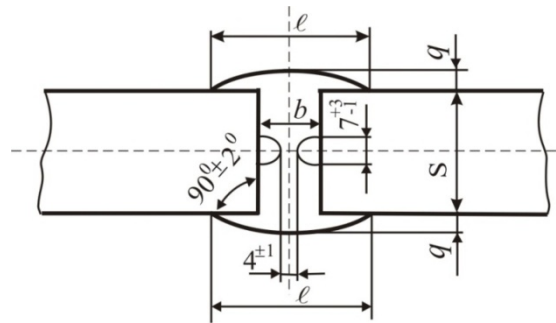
General view of a joint made by argon-arc welding (TIG)
